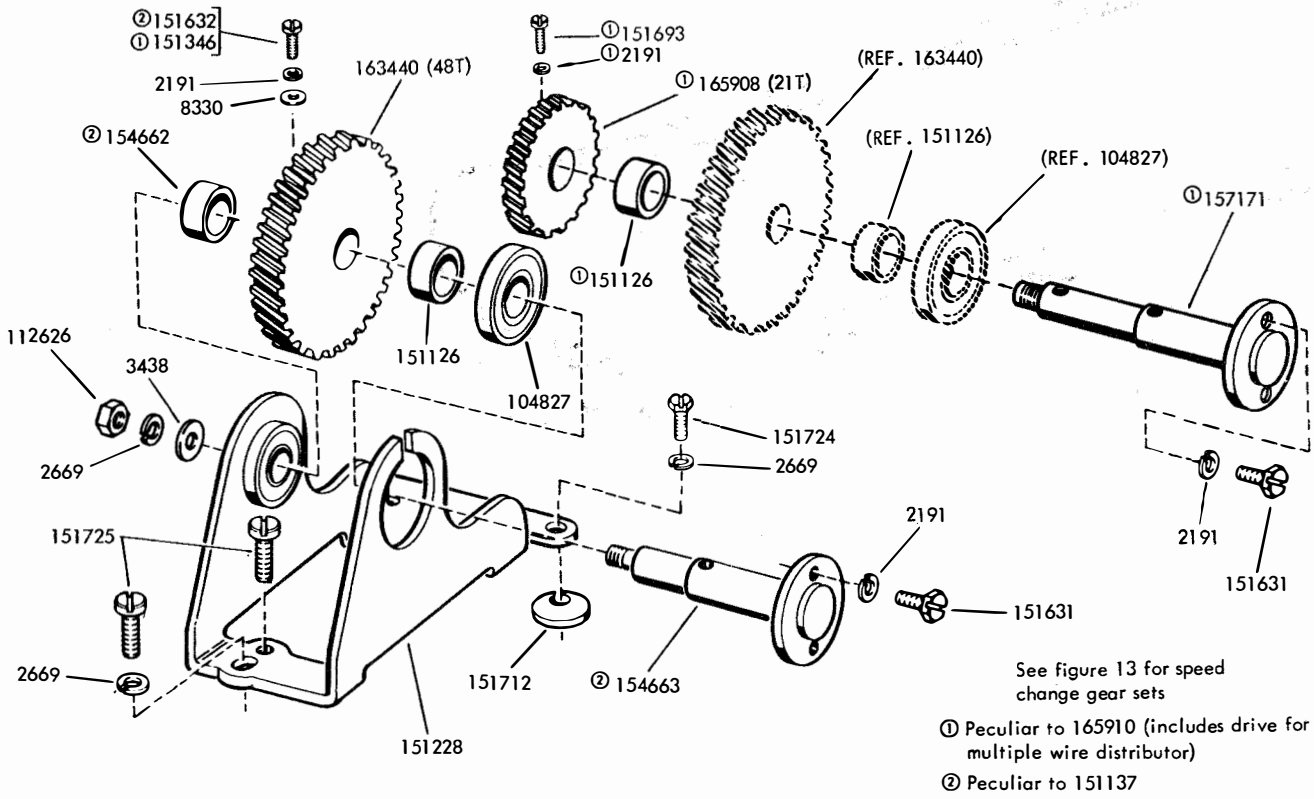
151137 AND 165910 INTERMEDIATE GEAR ASSEMBLIES
